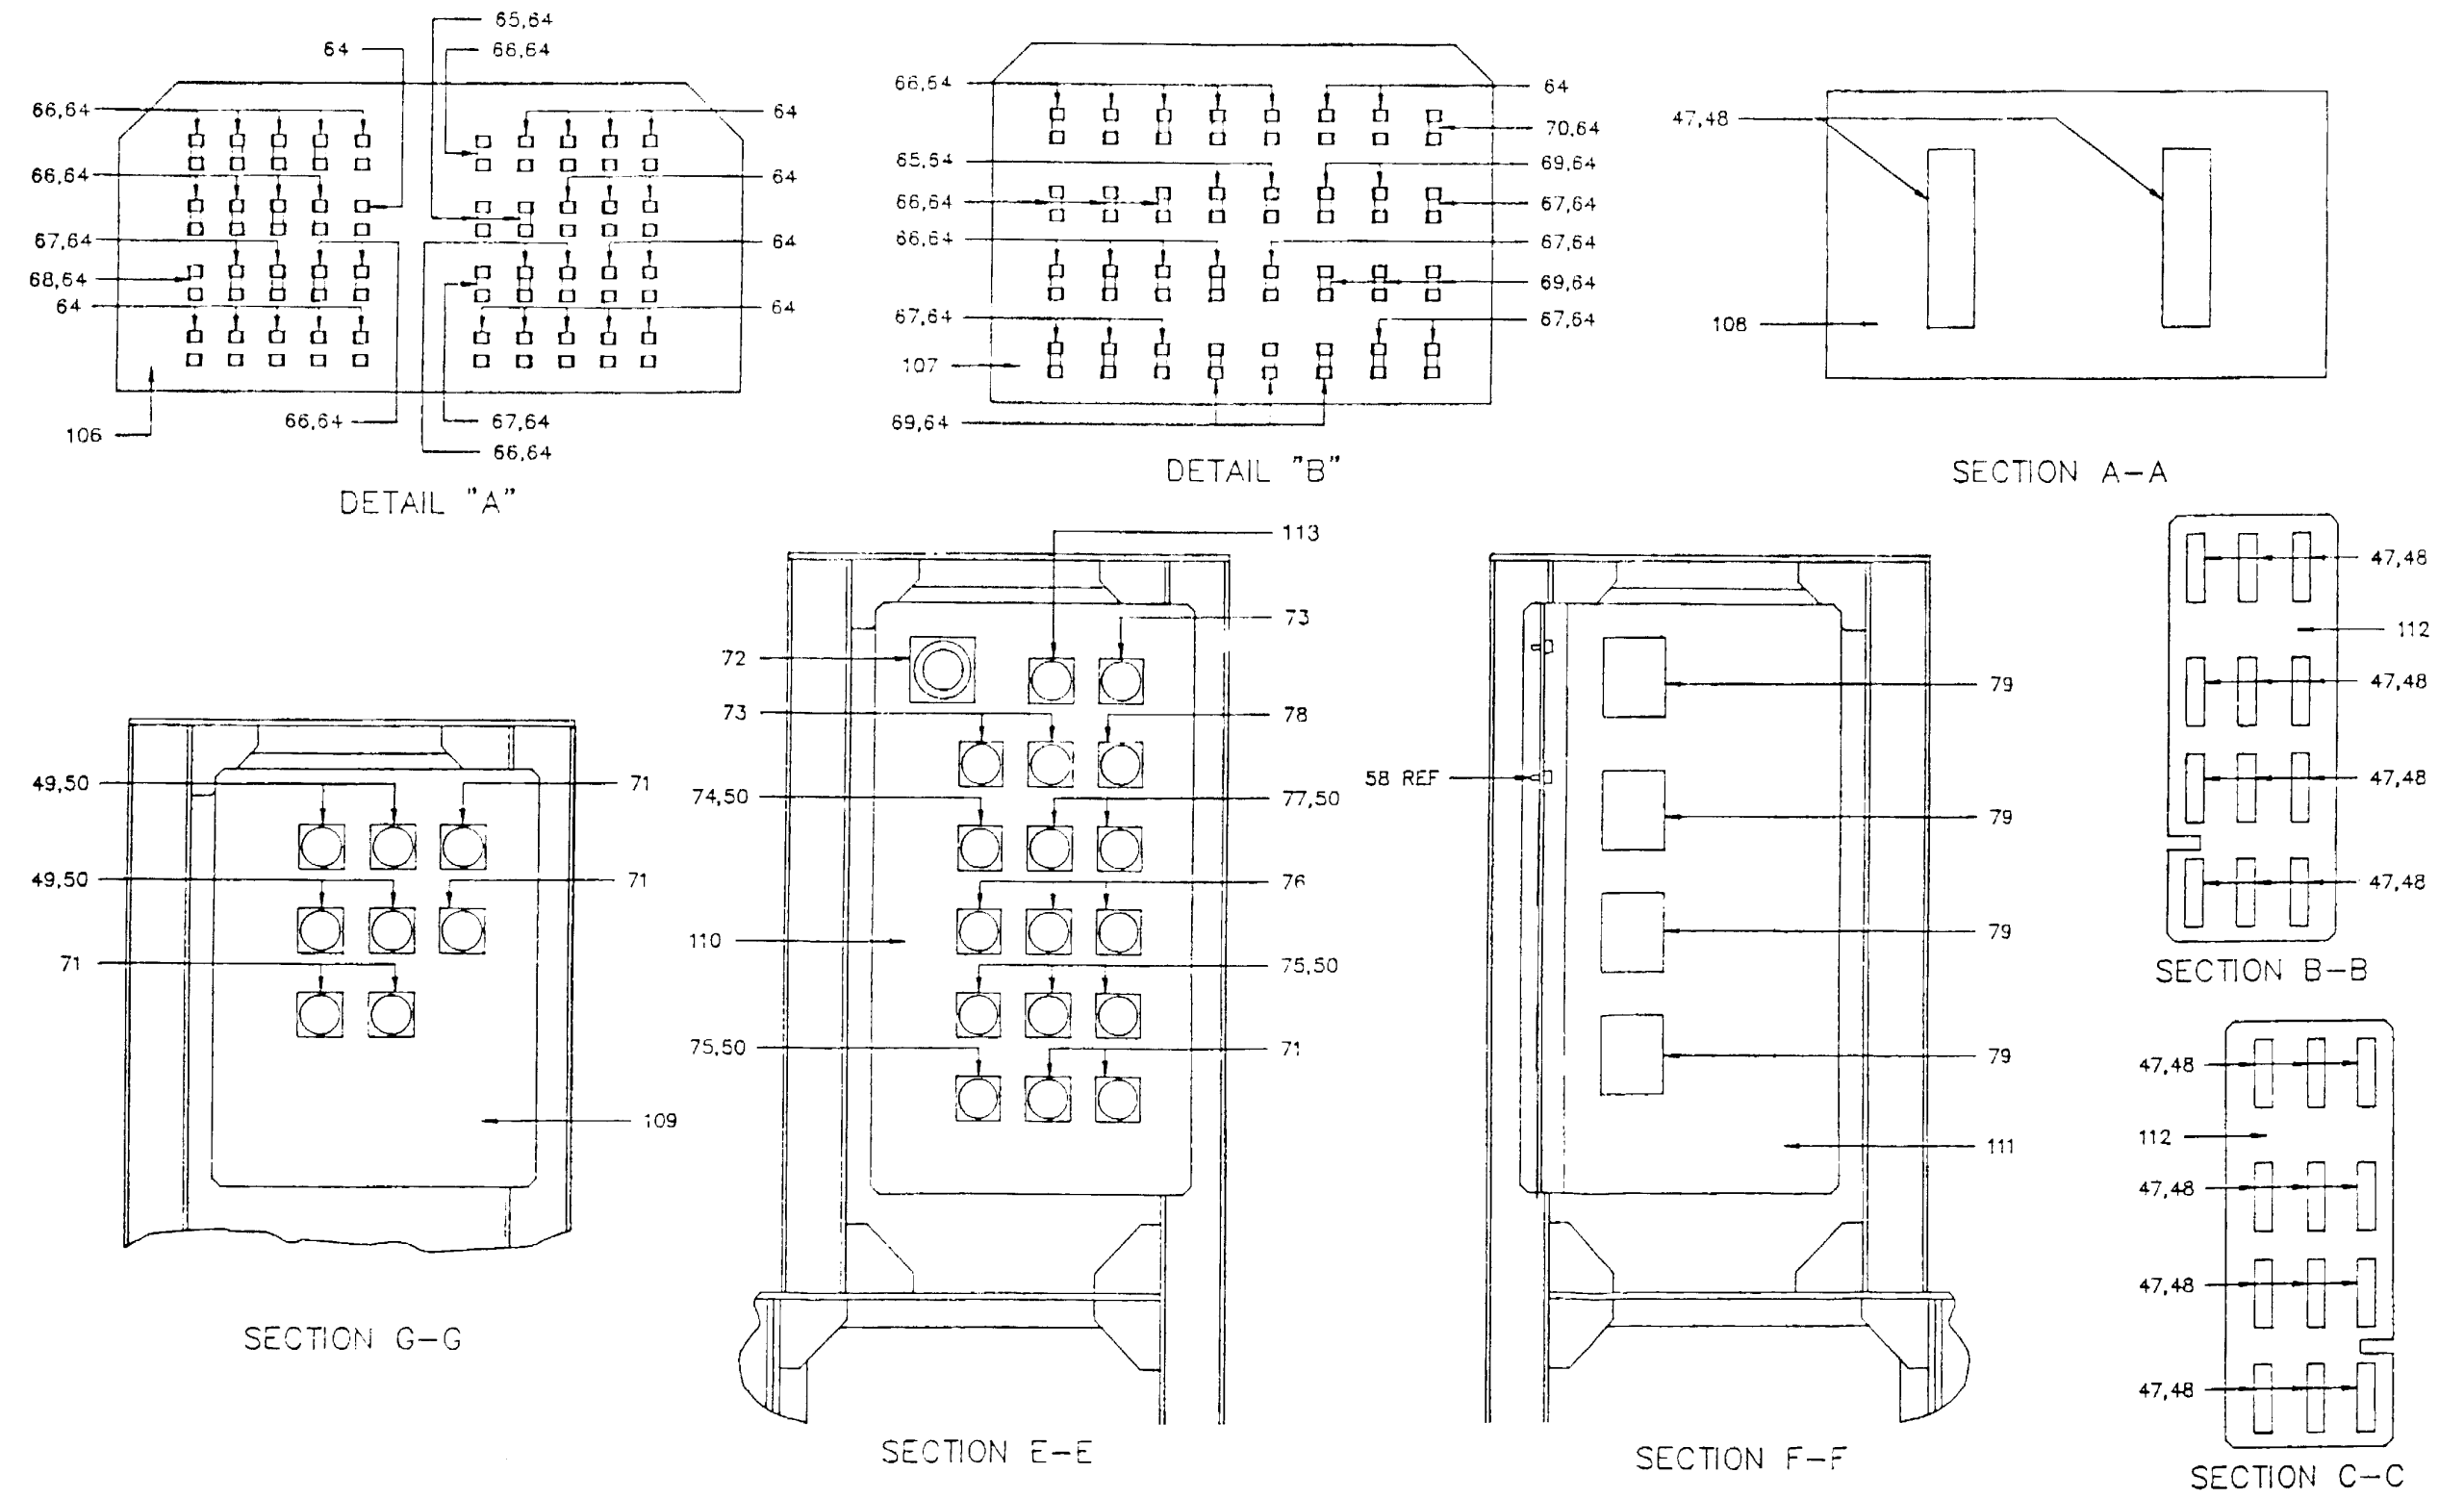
3SG Switchboard Assembly (Sheet 3 of 3)
